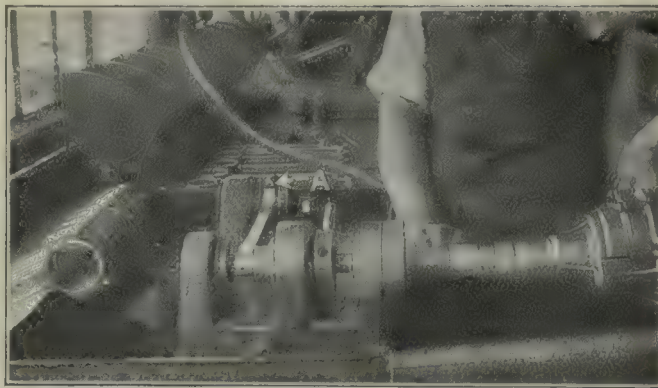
"HAND" REAMING WITH AIR MOTOR
